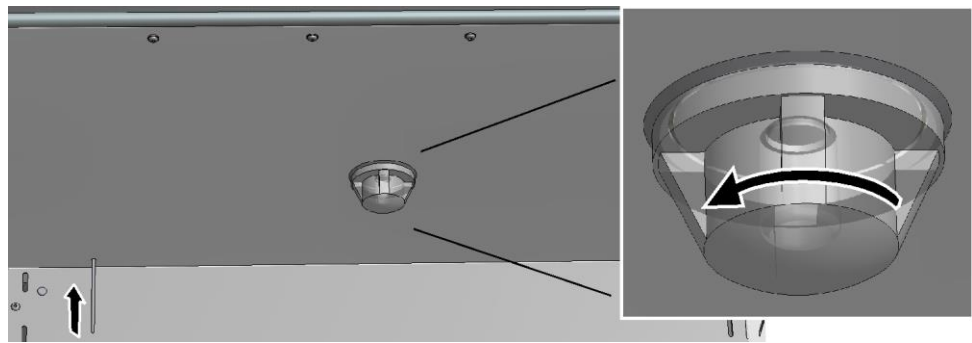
Dismantling the thermocouple and inside lighting (similar to picture)
